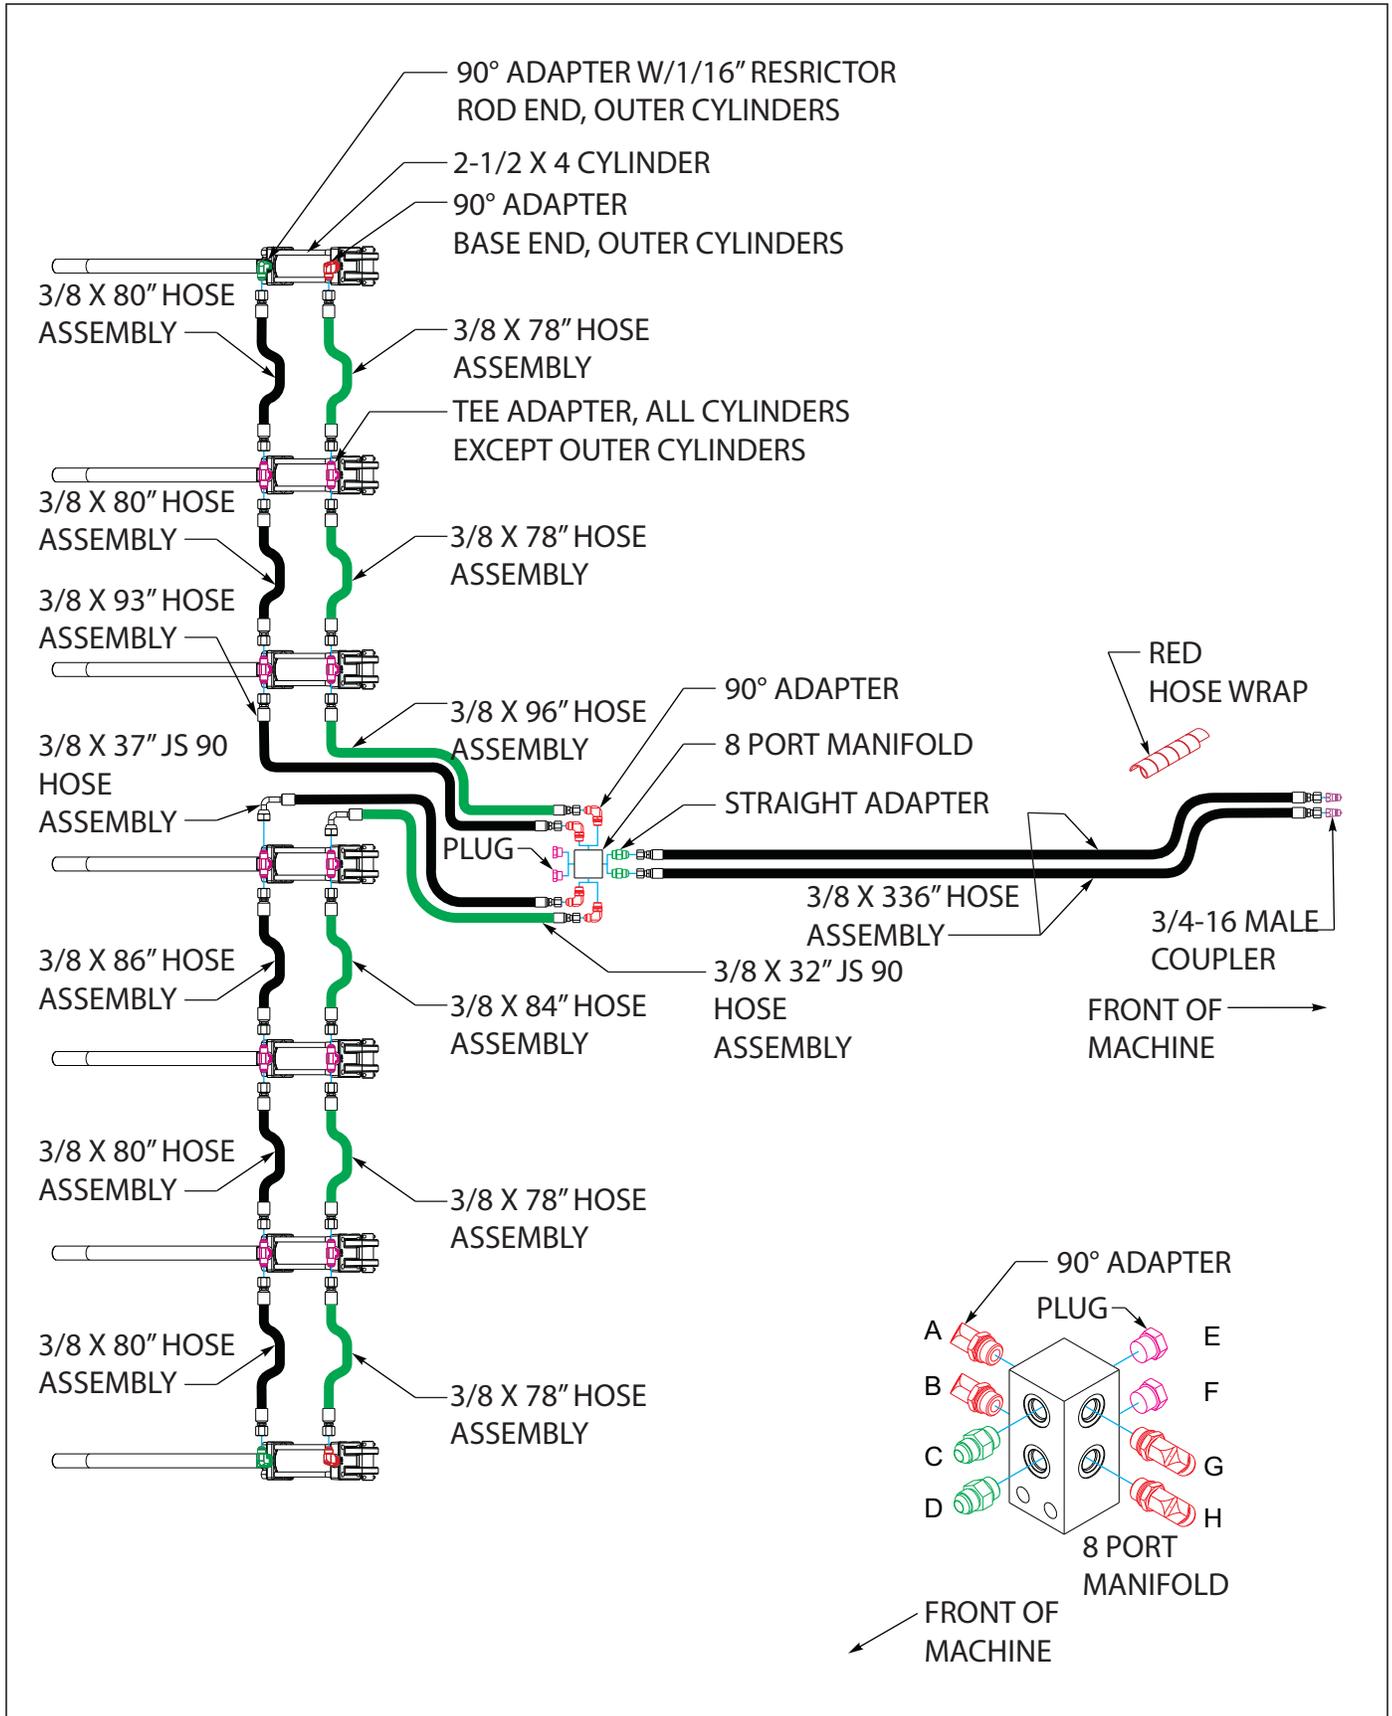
Hydraulic Manifold & Hose Mount Treader Assembly Hydraulic
